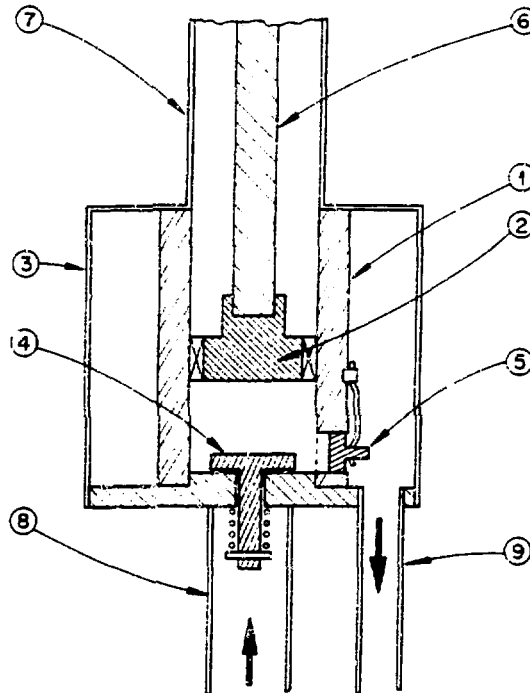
Pump body cross section: (1) cylinder, (2) piston, (3) discharge can, (4) inlet valve, (5) discharge valves, (6) piston rod, (7) support column, (8) inlet tube, and (9) discharge tube.
